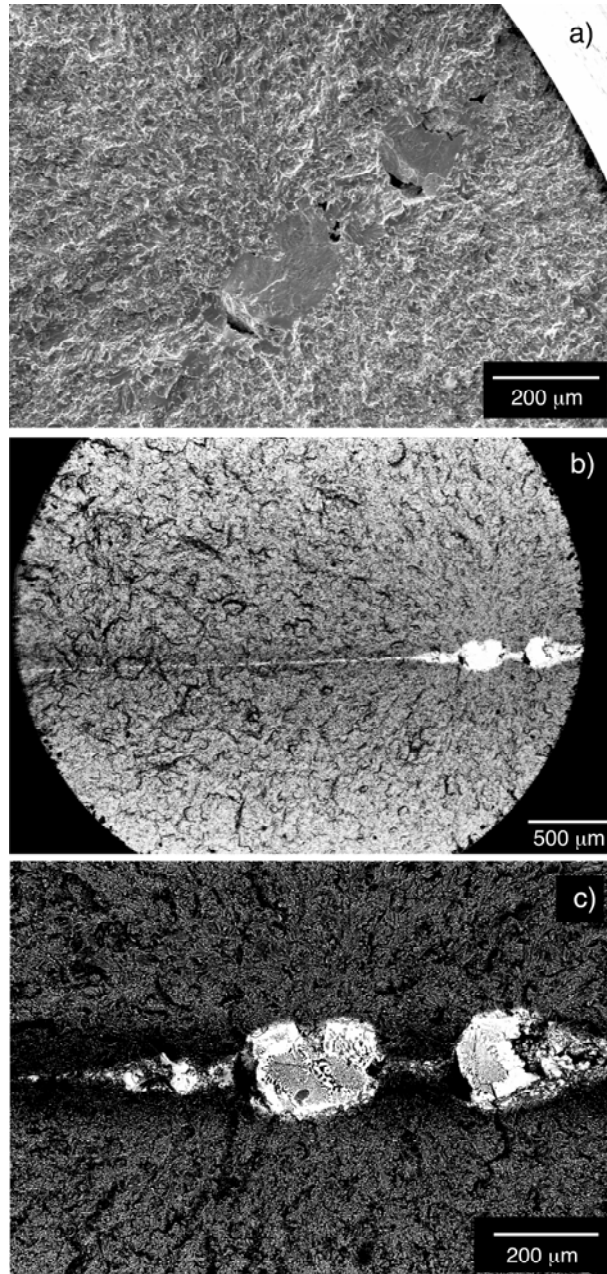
(a) Fracture surface of the tensile test specimen that broke at 480 MPa, see Fig. 14a, imaged using SE mode. (b) The same fracture surface imaged using BSE mode. It can be seen that very large inclusions are present on the fracture surface and are very likely the reason for the premature failure. The large amount of deformation that has been imparted into the disc can be seen from the length of the inclusion tails which extend over the whole 3.5 mm specimen diameter. Although EDX cannot be performed on a fracture face, the light colour of the defect indicates it is rich in heavy elements such as Nb or Ti. (c) Higher magnification of the inclusions, showing them to have a two phase nature.
